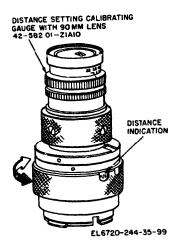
Distance setting calibrating gauge with 90mm lens 42-582.01-Z1A10.
